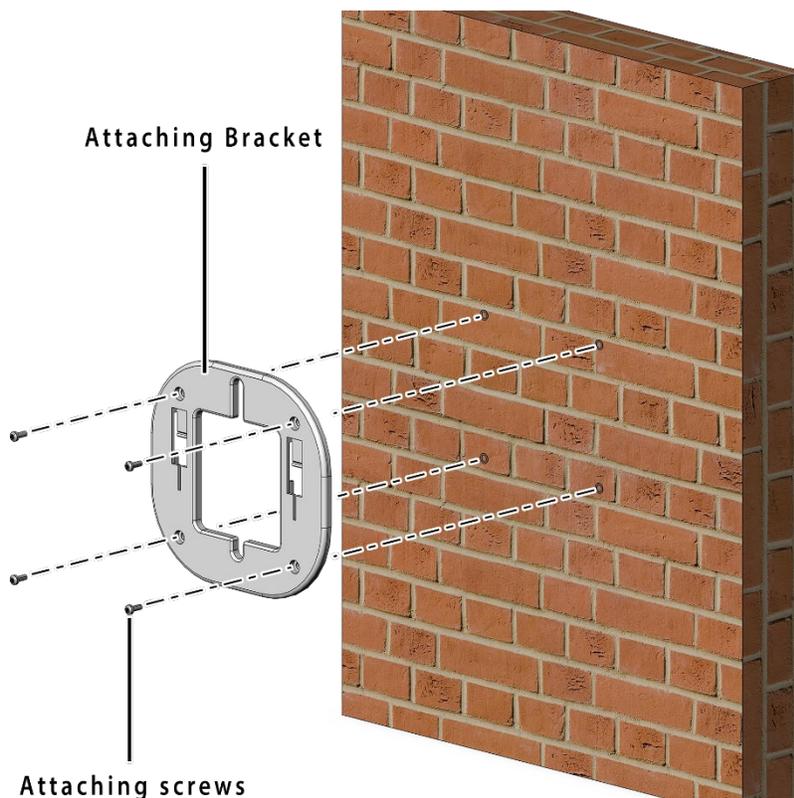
Attaching bracket on to the wall or ceiling for indoor AP
